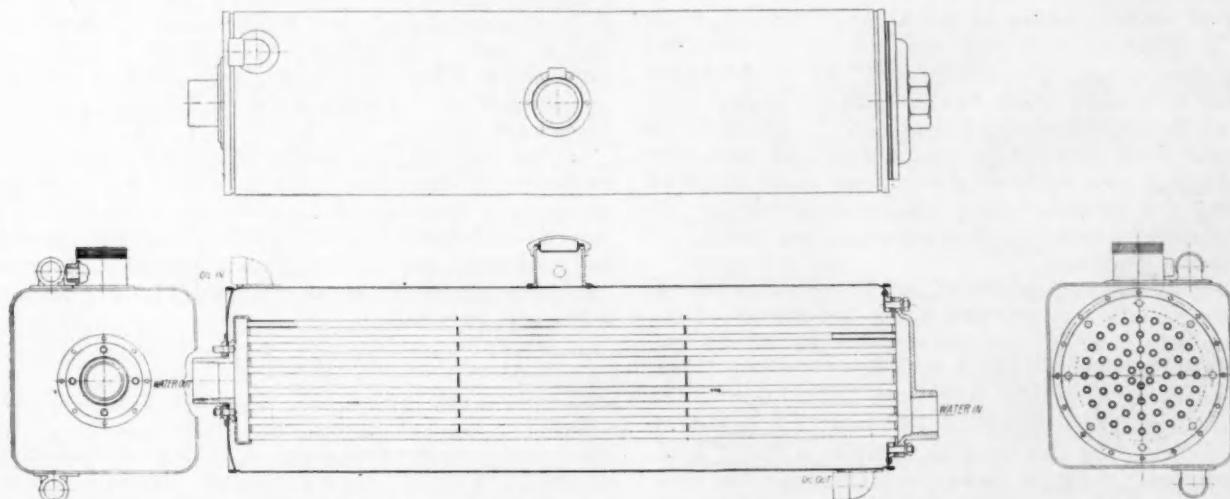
DIAGRAM OF A TYPICAL SYSTEM FOR COOLING THE OIL USED TO LUBRICATE A MOTORBOAT ENGINE.
